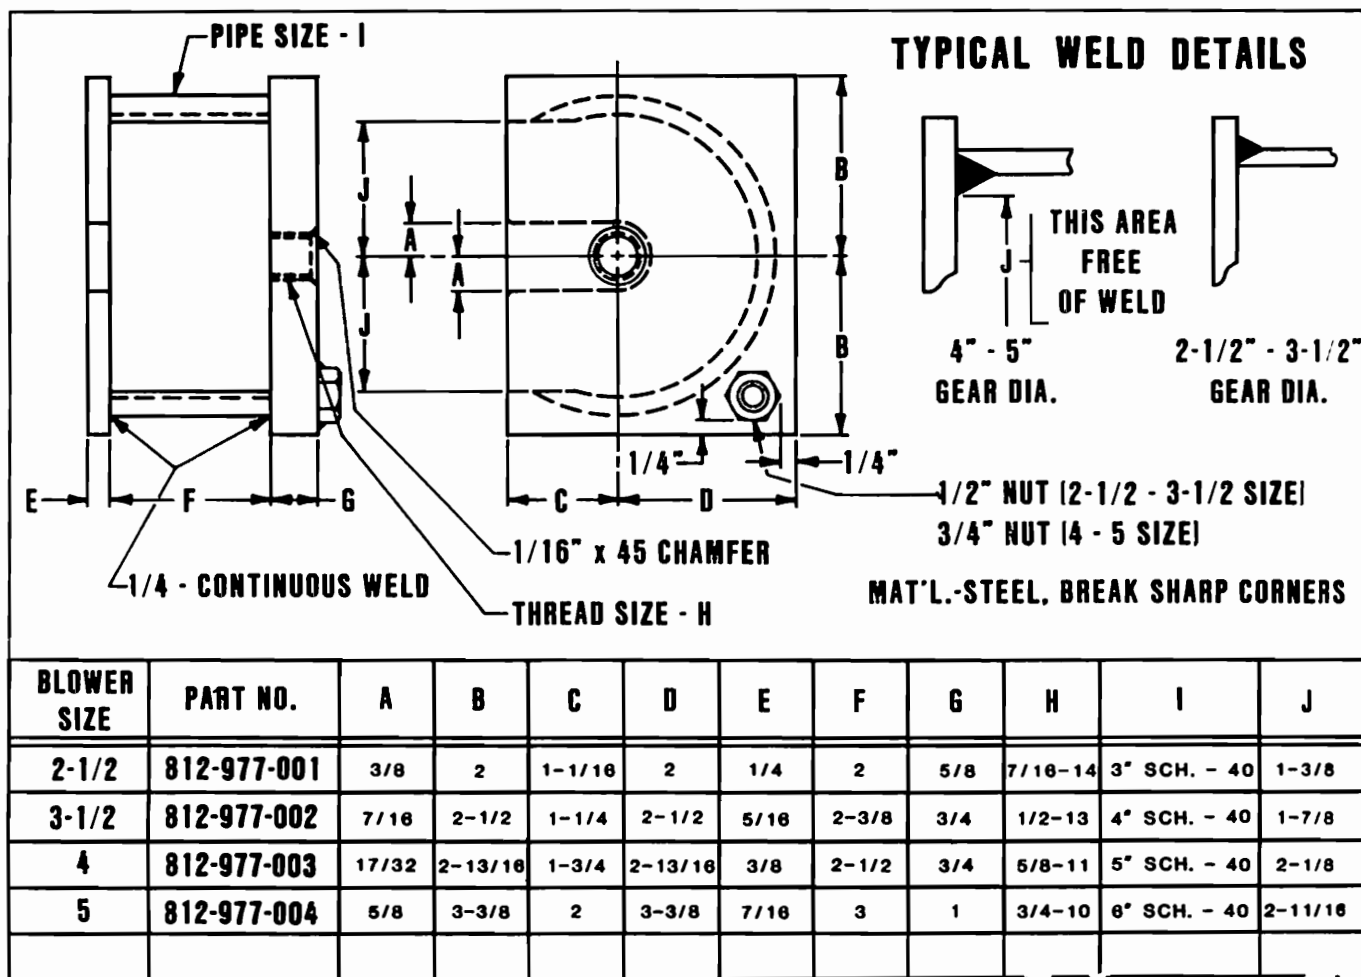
Gear Pullers for U-RAI with Tapered Gear Bores
